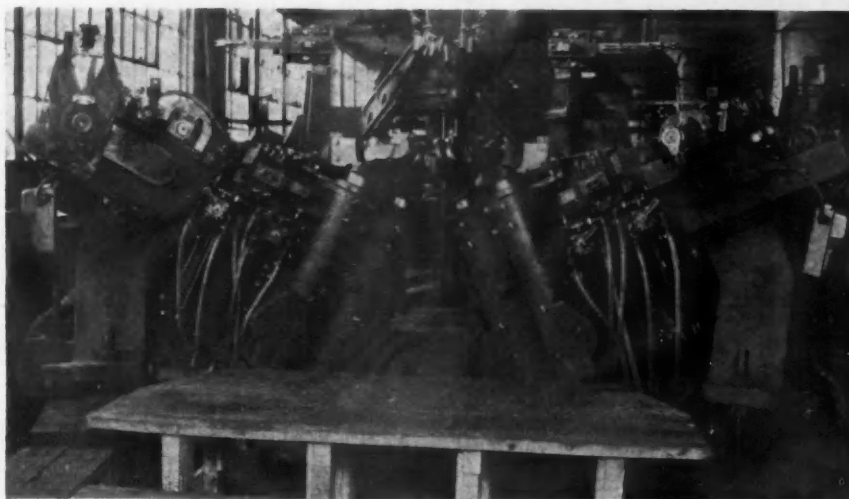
Highly specialized flash welding machines are used for body and door construction and for joining irregular sheets to reduce the amount of scrap.
